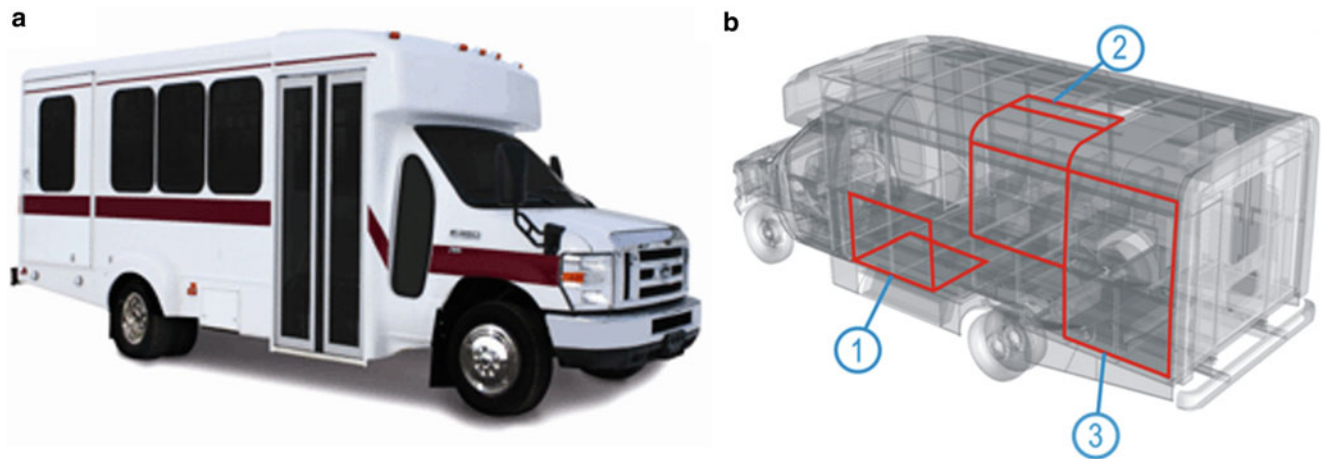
(a) View of a typical cutaway bus (b) key structure components examined in the component testing program (1—wall to floor connection, 2—roof to wall connection, 3—sidewall)
